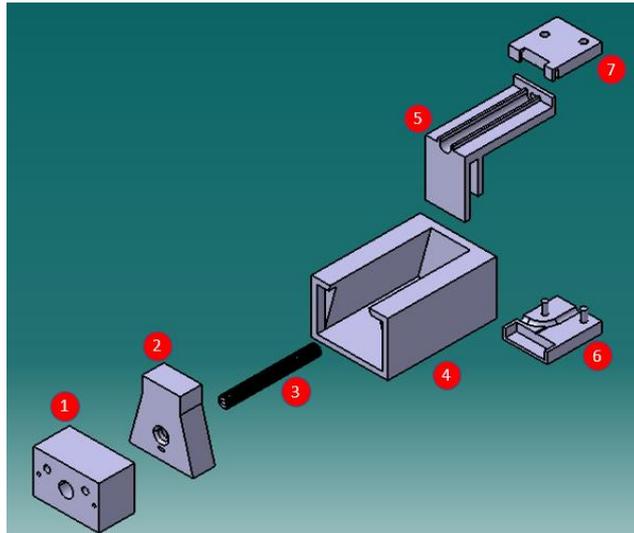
3D CAD model of the injection pump: Part 1 – Stepper motor support; Part 2 – Plunger; Part 3 – M10 threaded spindle; Part 4 - Base; Part 5 - Syringe Support; Part 6 – Lower nozzle; Part 7 - Top nozzle.
